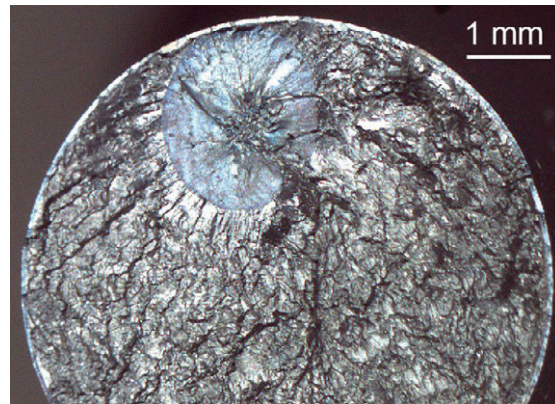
Optical micrograph of fracture surface of a coated specimen with subsurface fatigue crack initiation
